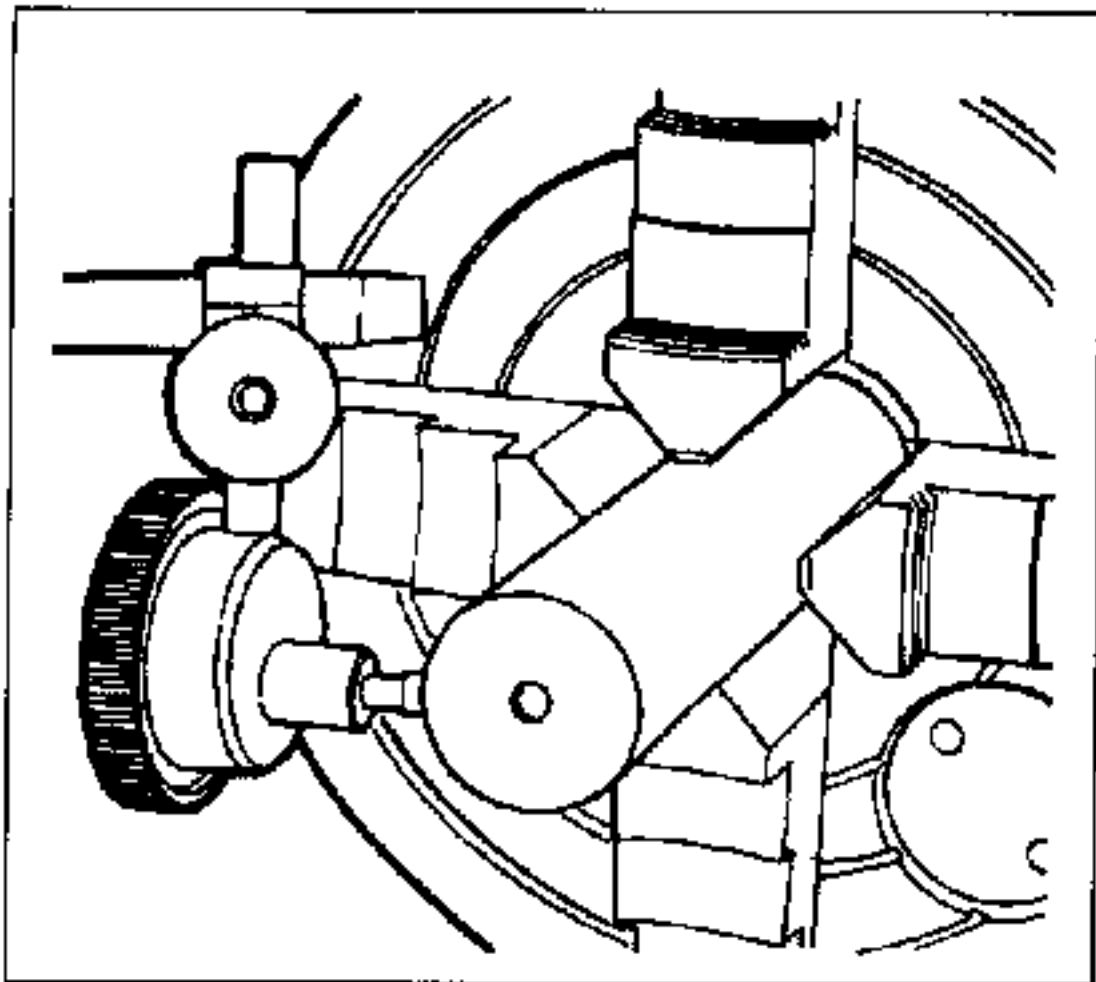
Mounting work in a 4-jaw independent chuck.
